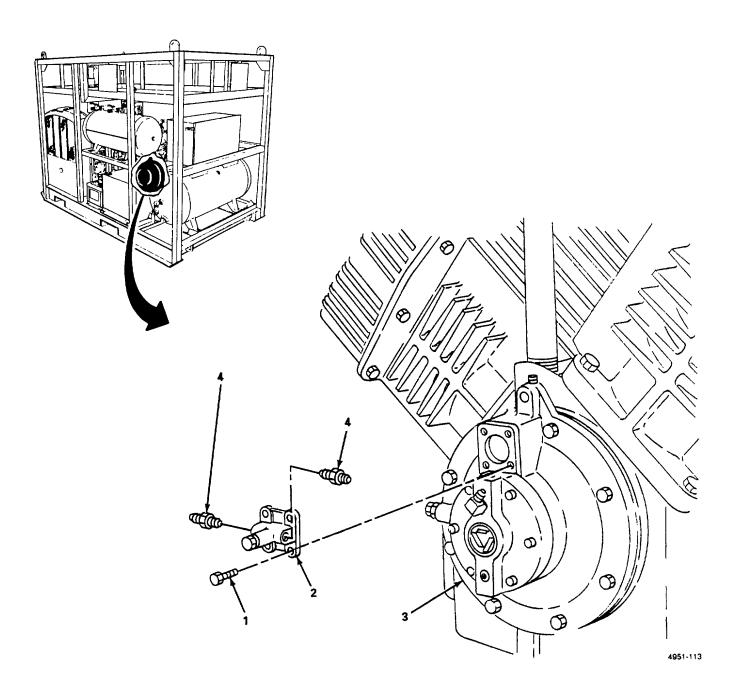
Hydraulic Unloader Assembly, Replace.
